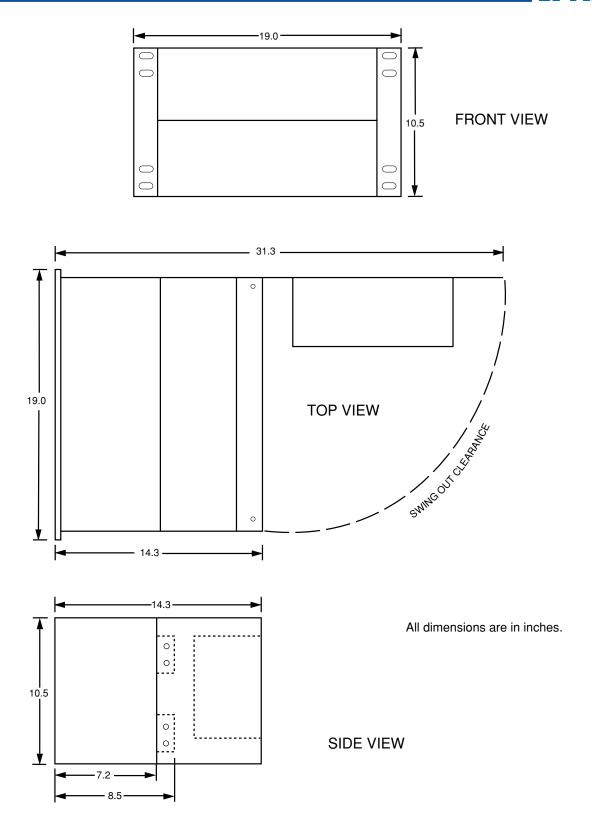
Outline and Nominal Dimensions of Board Chassis with PSS500 Swing Out Power Supply Mounted
